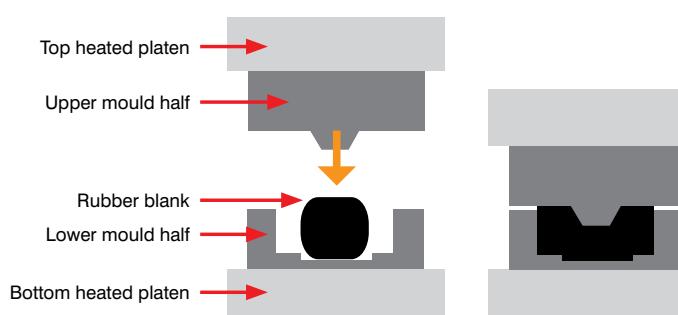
Open mould (left) with elastomer blank placed in cavity, and (right) mould closed forming the finished product profile.
